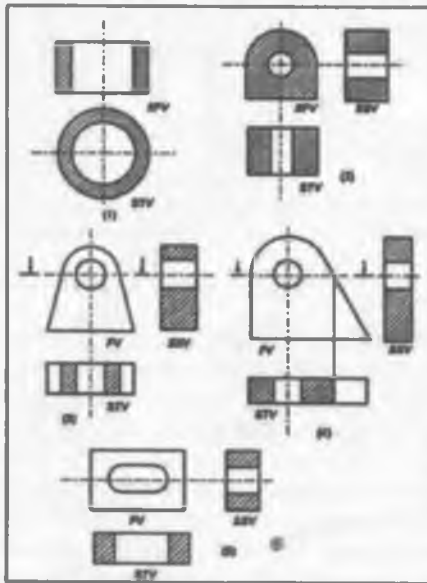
Sectional Views Drawn of Basic Solid Shapes
